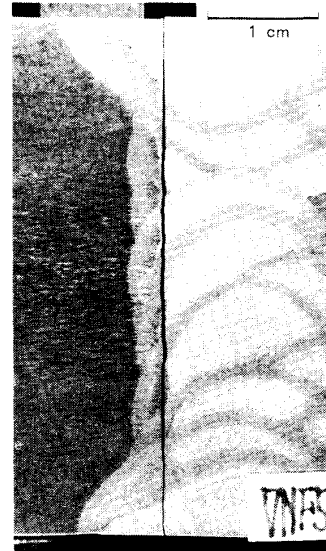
Typical macro-etched section of the weld HAZ COD specimen, which shows straight fusion line and the location of fatigue pre-crack front close to the fusion line : steel A.
